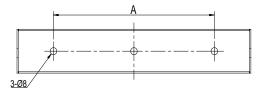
Installation bracket 1 for models of BPD0K7-2K2TN(AC)
